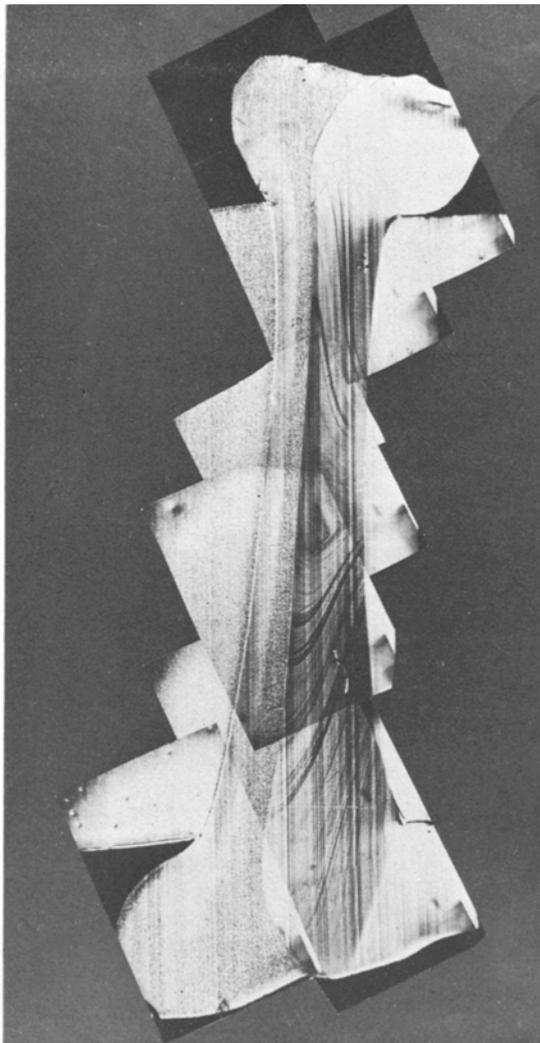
This shows the appearance of a weld made using a welding pressure which is too low (transmission optical micrograph). $\times 12$.
